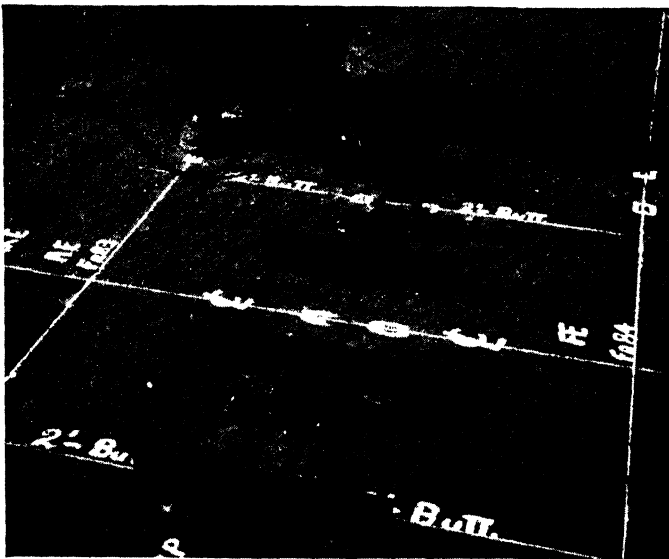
All-welded butt made up and ready for production welding.
